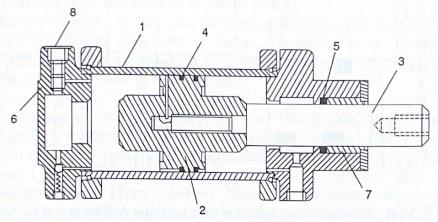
Double acting cylinder: 1. Tube 2. Piston 3. Piston rod 4. Double O-ring packing on piston 5. O-ring for piston rod 6. End cover 7. Bush 8. Cushion assembly
